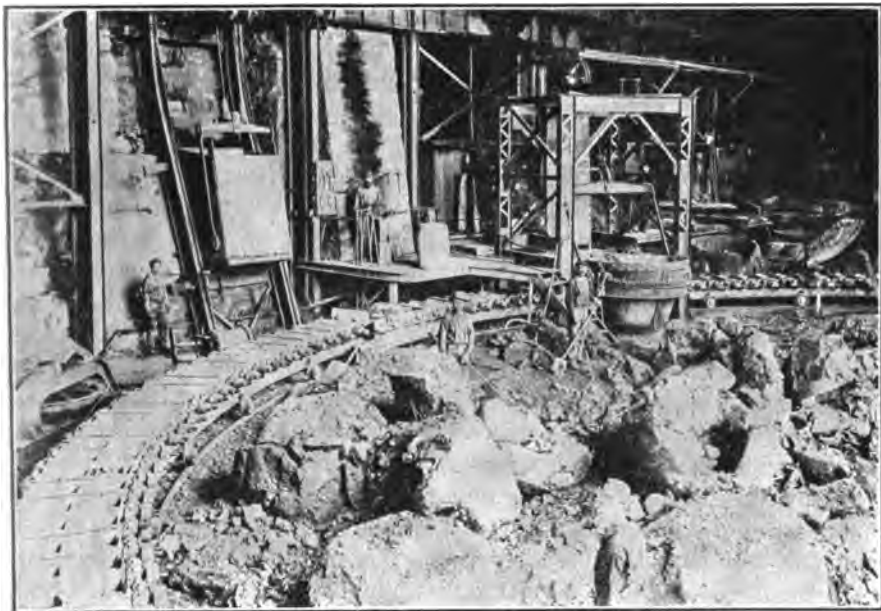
MACHINE FOR CASTING MOLTEN SLAG EQUIPPED WITH SPECIAL POURING LADLE.
